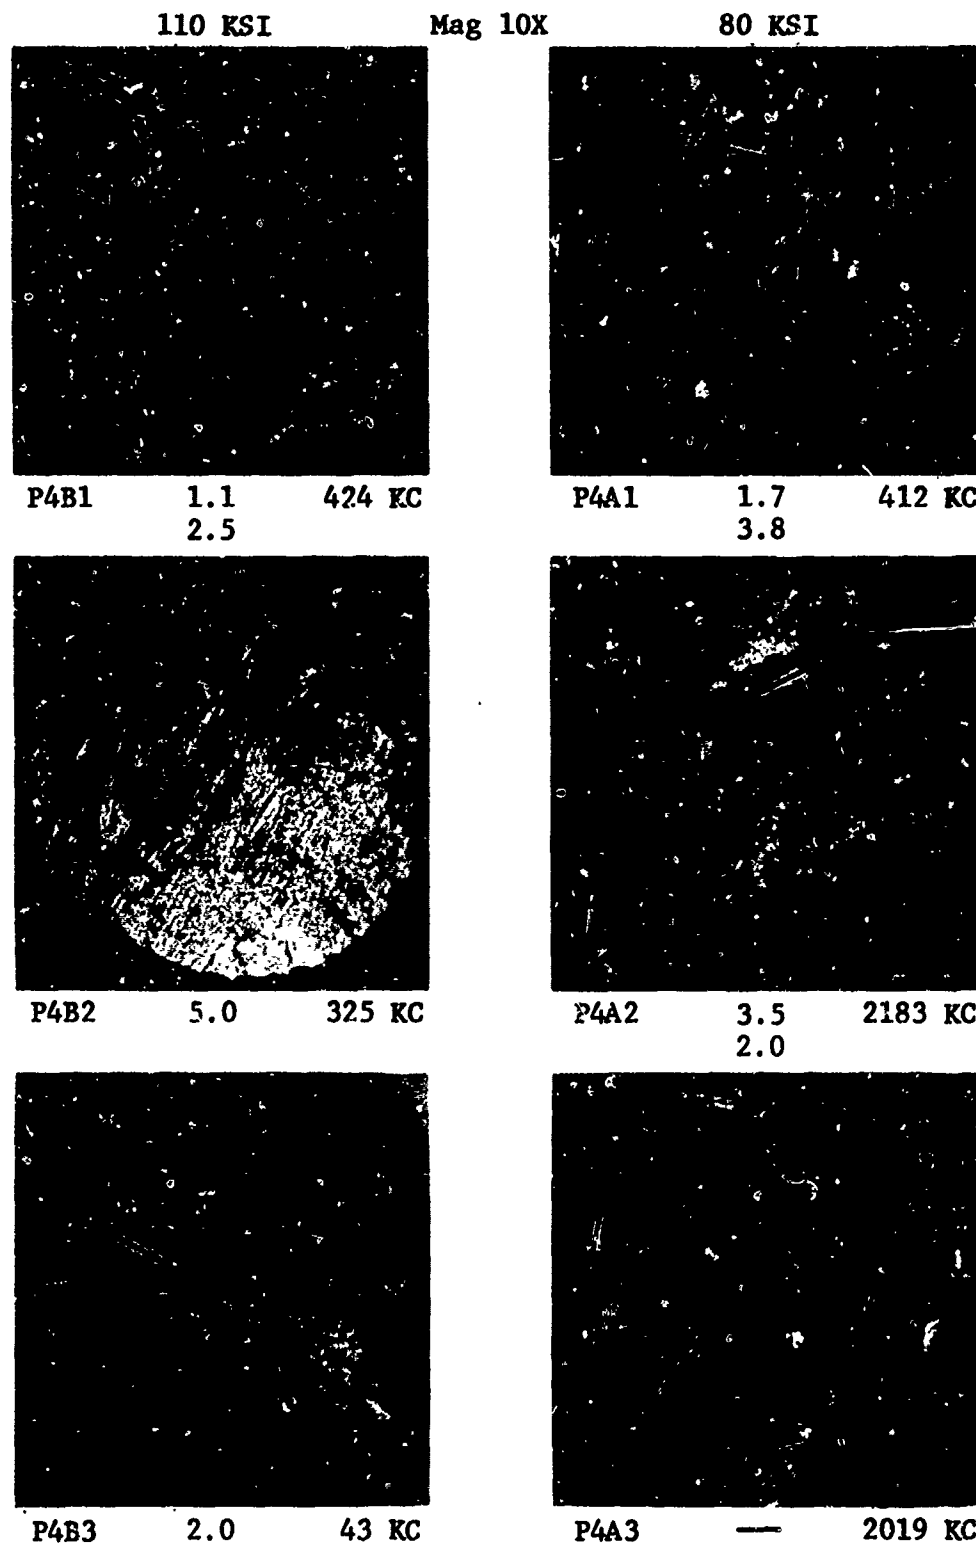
Fracture Surfaces of Failed Fatigue Specimens Series P4-Double-Bond/Single-Axis Diffusion Bonded - ASTM Grain Size No. 10
